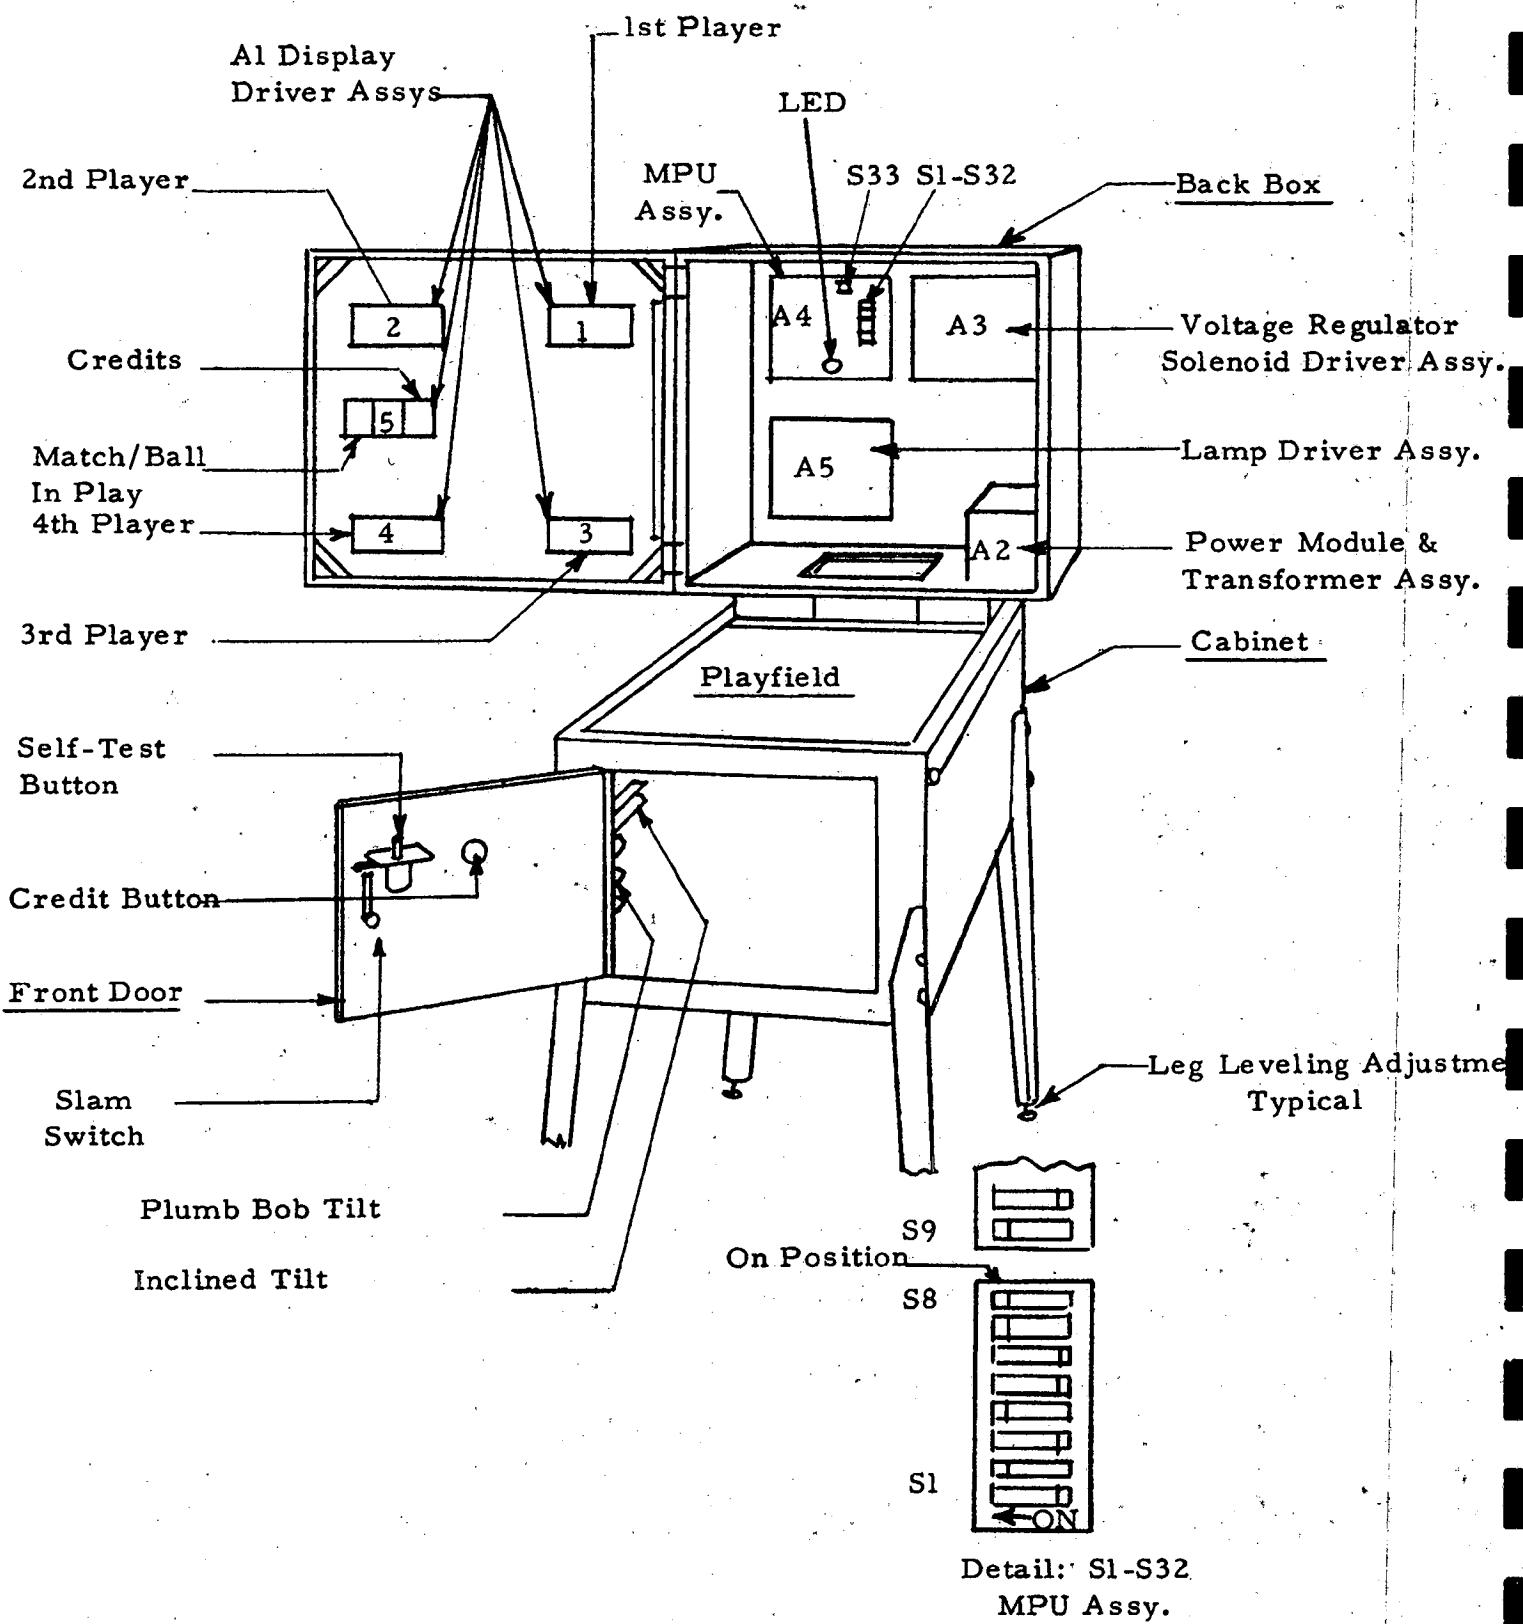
FIG. III. ASTRO ELECTRONIC PIN BALL MACHINE
